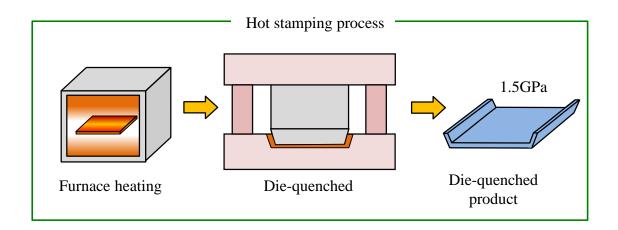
Furnace heating, hot stamping, and die quenching process of quenchable steel sheet.
